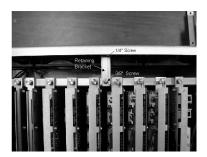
Retaining Bracket for Cooling Fan Assembly
